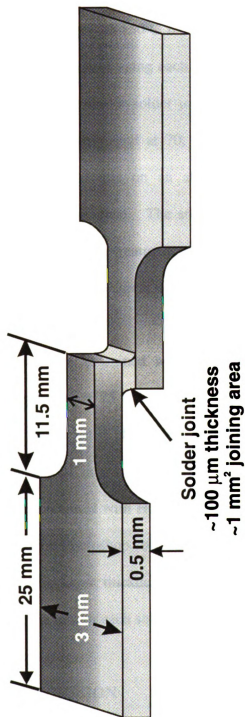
Schematic diagram of geometry and dimensions of solder joints.
